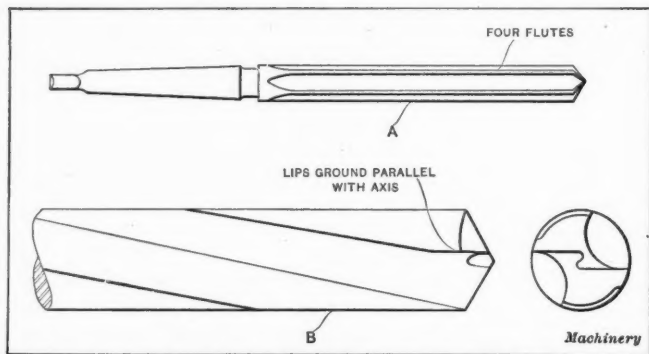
Straight Fluted Drill *A* and Method of grinding Twist Drill *B*, for Use in Jig shown in Fig. 1
